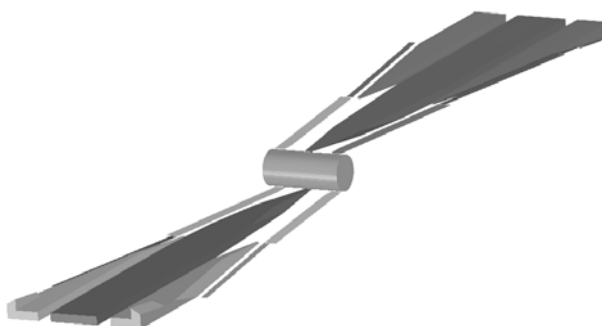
3D model of the tool and the workpiece in the FCWR.
